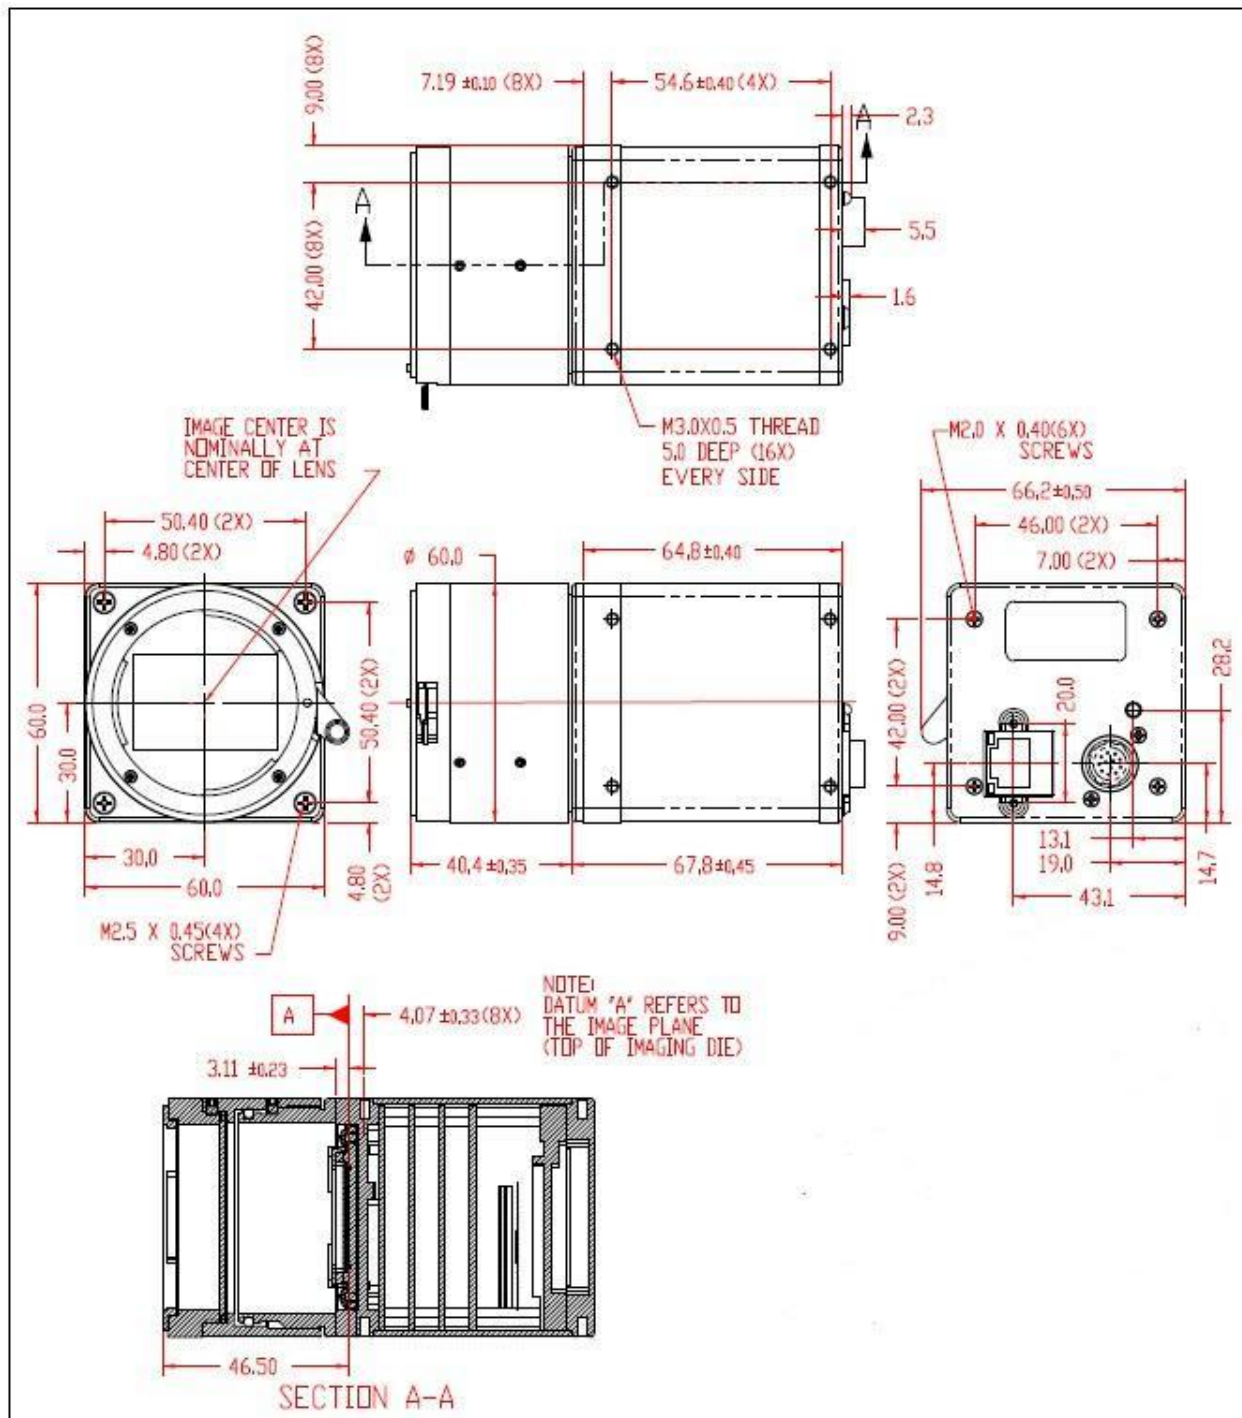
a – F-mount GigE vision output – dimensional drawings for IGV-B3320, IGV-B4821 and IGV-B6620.
